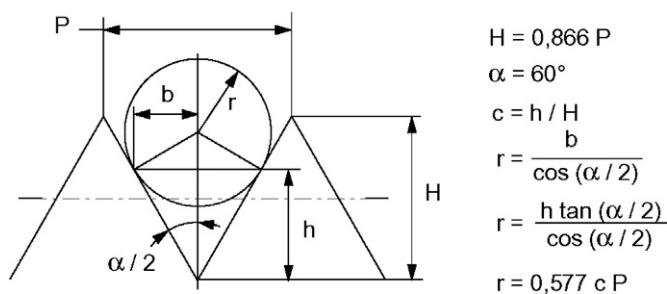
Metrical thread, configuration, probing ball radius r for probing near the flanks (using a self-centring probing mode)
